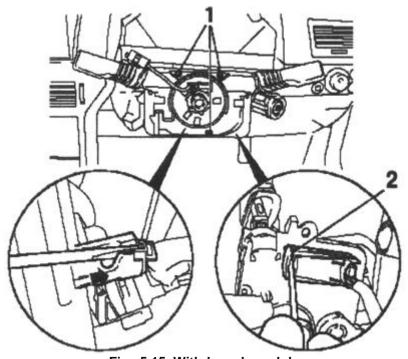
Withdrawal module: 1 - bolts fastening, 2 - wiring harness connector
